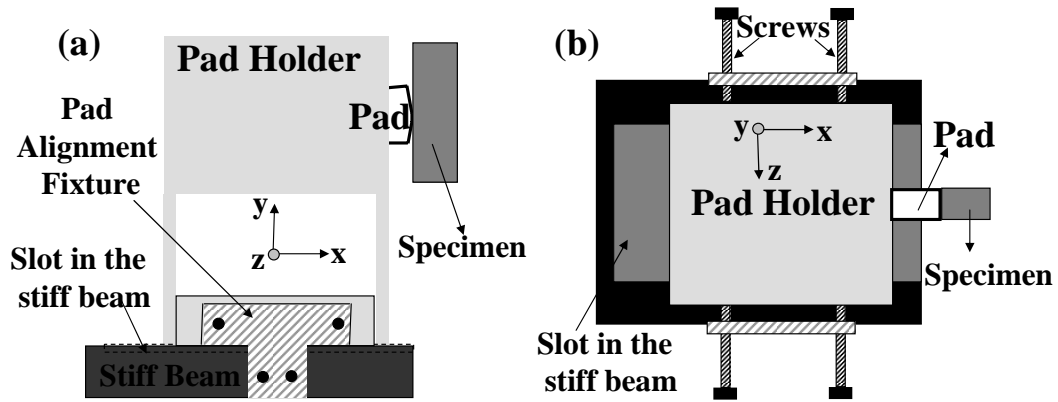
Schematic of the pad alignment fixture. (a) Front view of pad alignment (b) Top view of pad alignment fixture. By adjusting the four screws the pad holder block can be translated along z-axis and rotated about y-axis with respect to the specimen.
